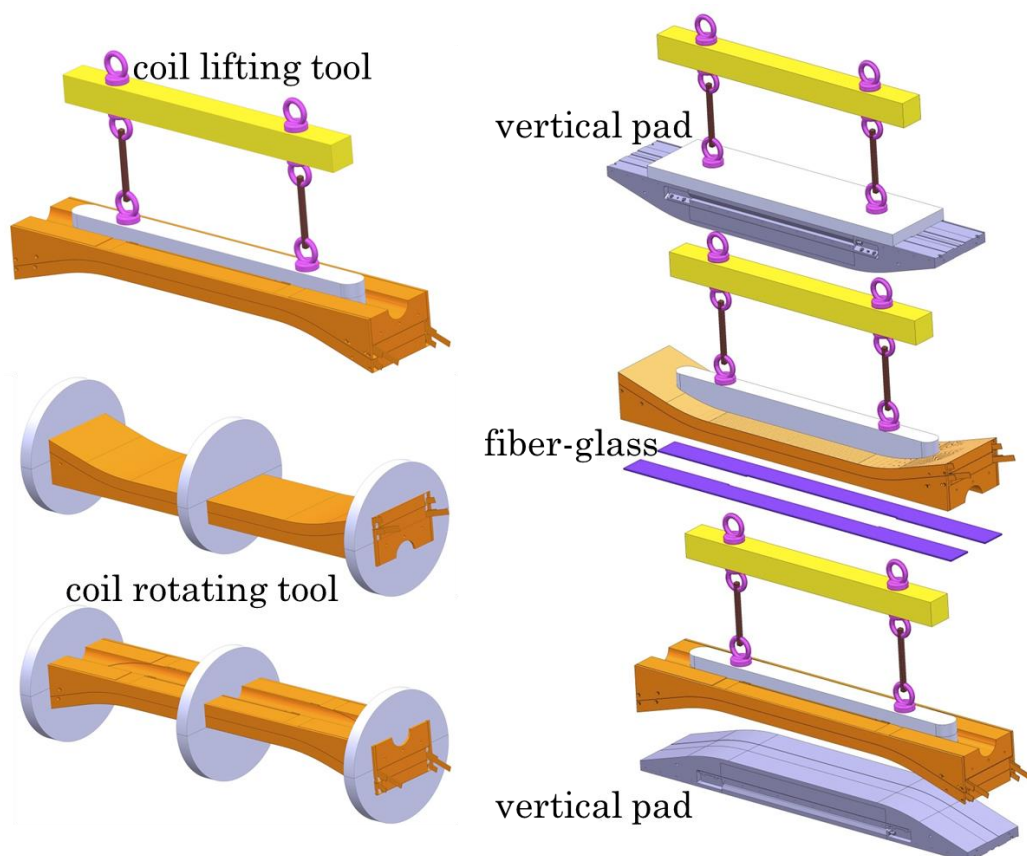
Coil assembly sequence: coils on vertical pads.
